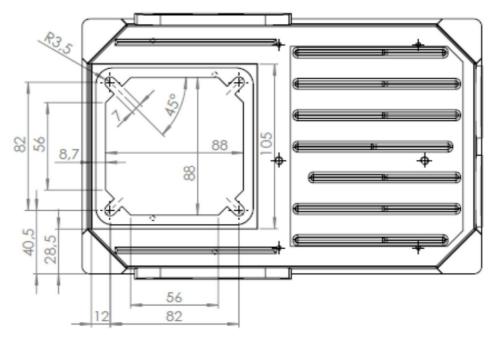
Fixing dimensions for ITTP(D) 4.0-5.5 M fixing type M132
